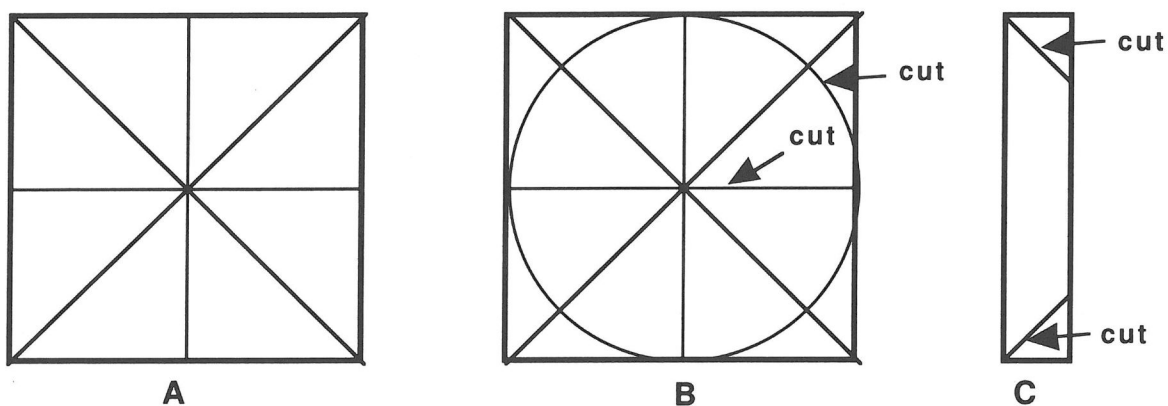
Marked-up base (A), protractor (B), and tubing holder (C). B should first be cut into a circle and then cut horizontally. C should just have the edges trimmed.
